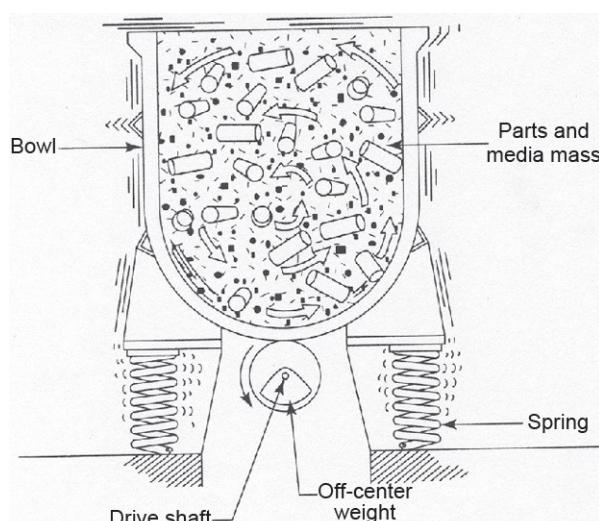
Sectional view of tub-type vibratory finishing machine (courtesy: SME)
